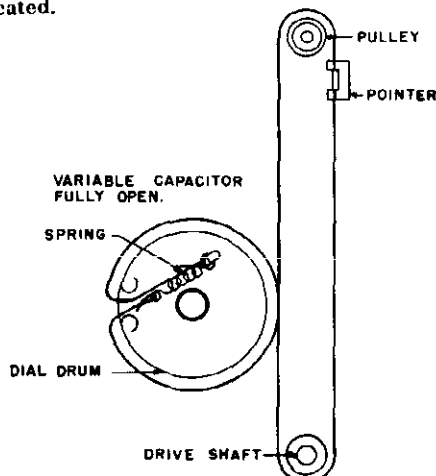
DIAL CORD DRIVE (REAR VIEW)
